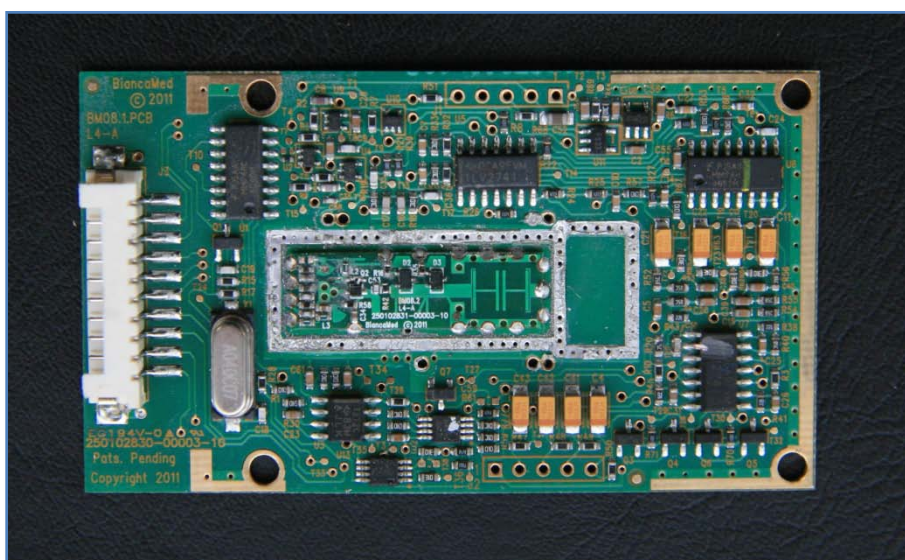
Sensor PCB Front: Resonant Cavity Removed
